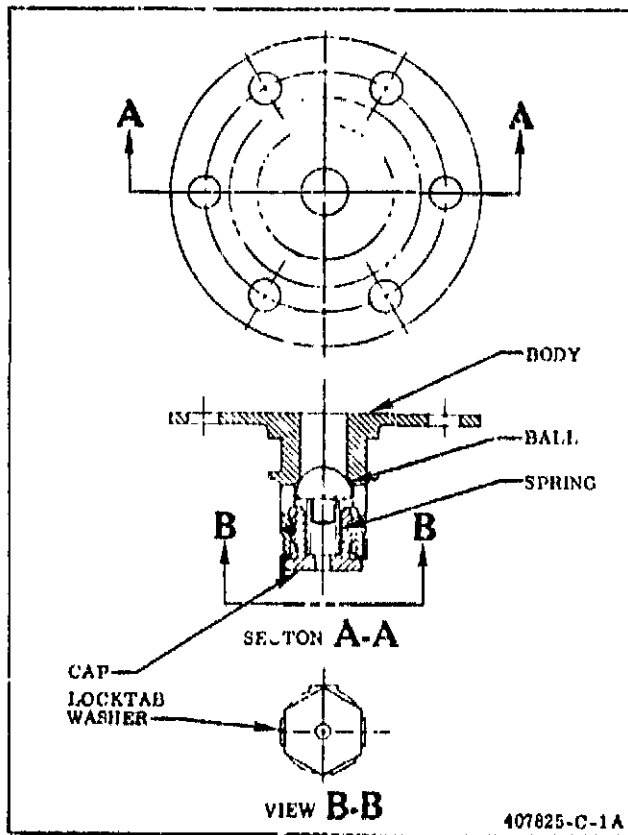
Inert Prefill Check Valve--Cutaway View
